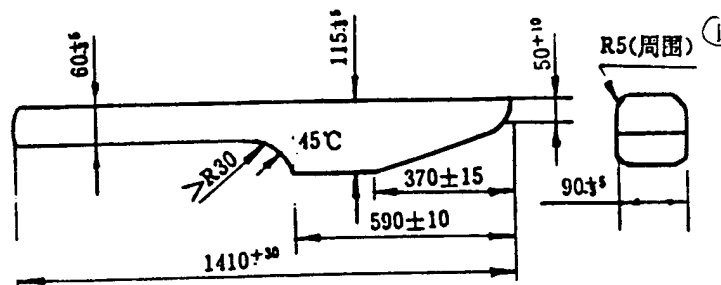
Lower Cabin Connector Premanufacture Stock Diagram (1)
